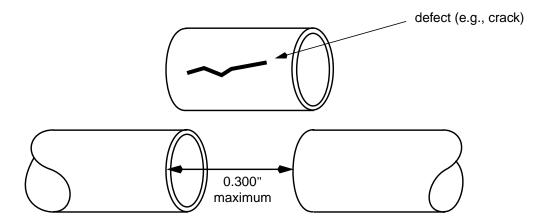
Maximum Tube Cut-Out for Single Union Repair
